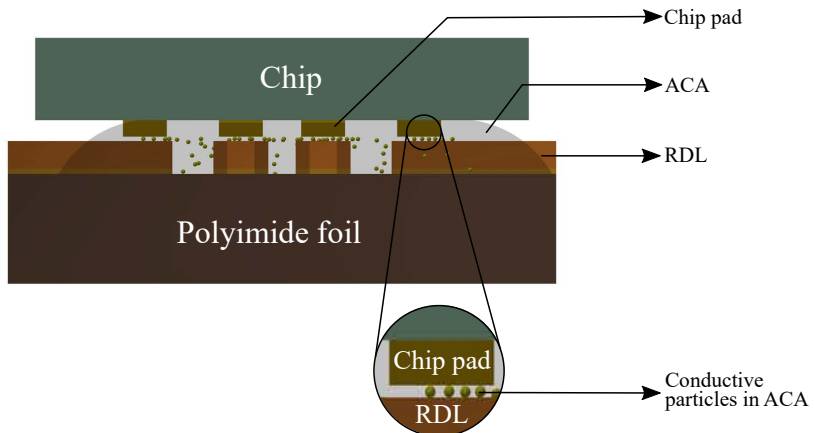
Sketch of the cross-section of flip-chip bonded CFP
